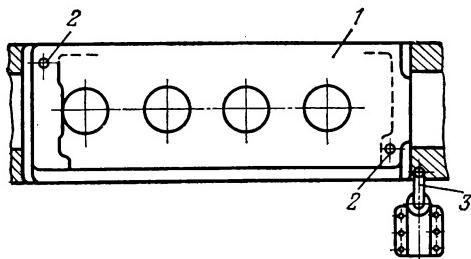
Arrangement for tentatively checking the position of a cylinder block before it is fixed by the locating pins:
